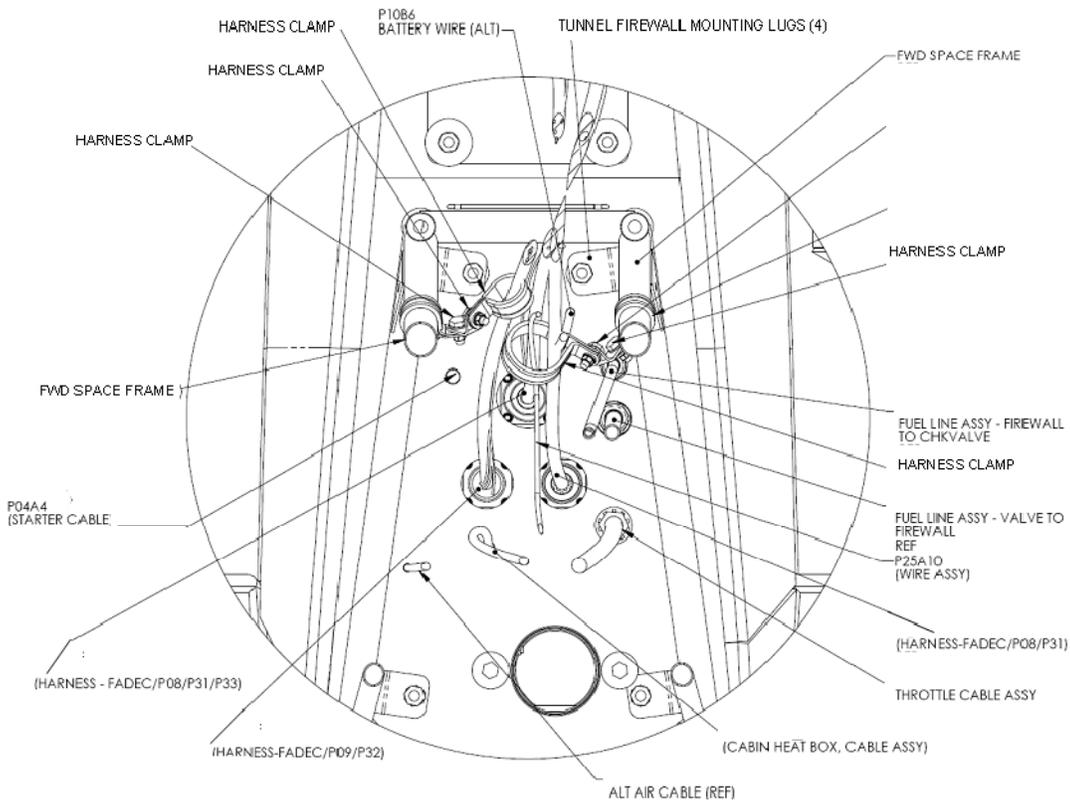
Tunnel Firewall Assembly Disconnects - Fuselage
